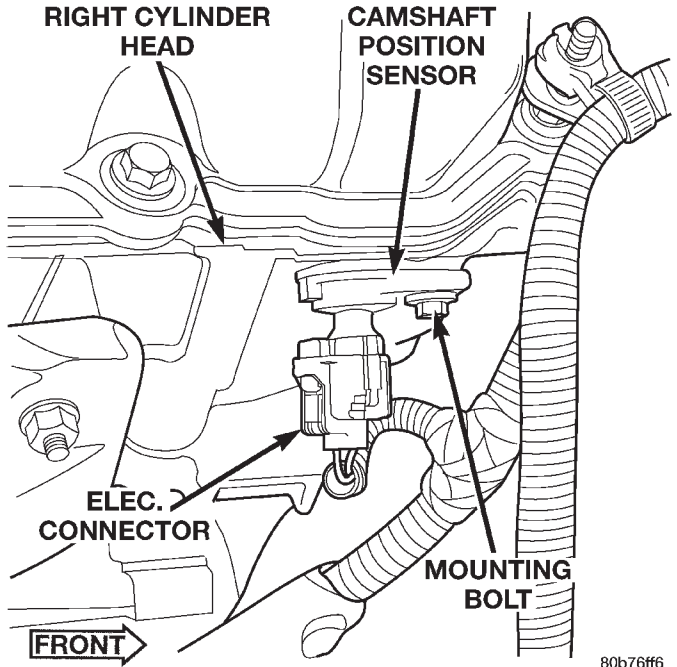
Camshaft Position Sensor—4.7L V-8 Engine
